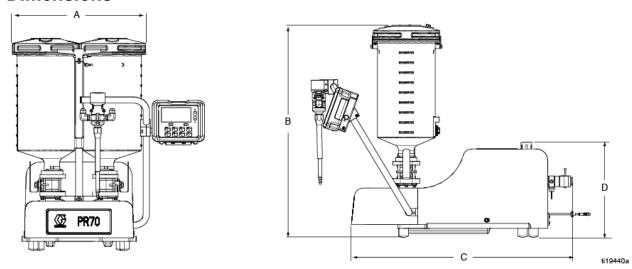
PR70 Dimensions (ON-Board PE Tank version Illustrated)
